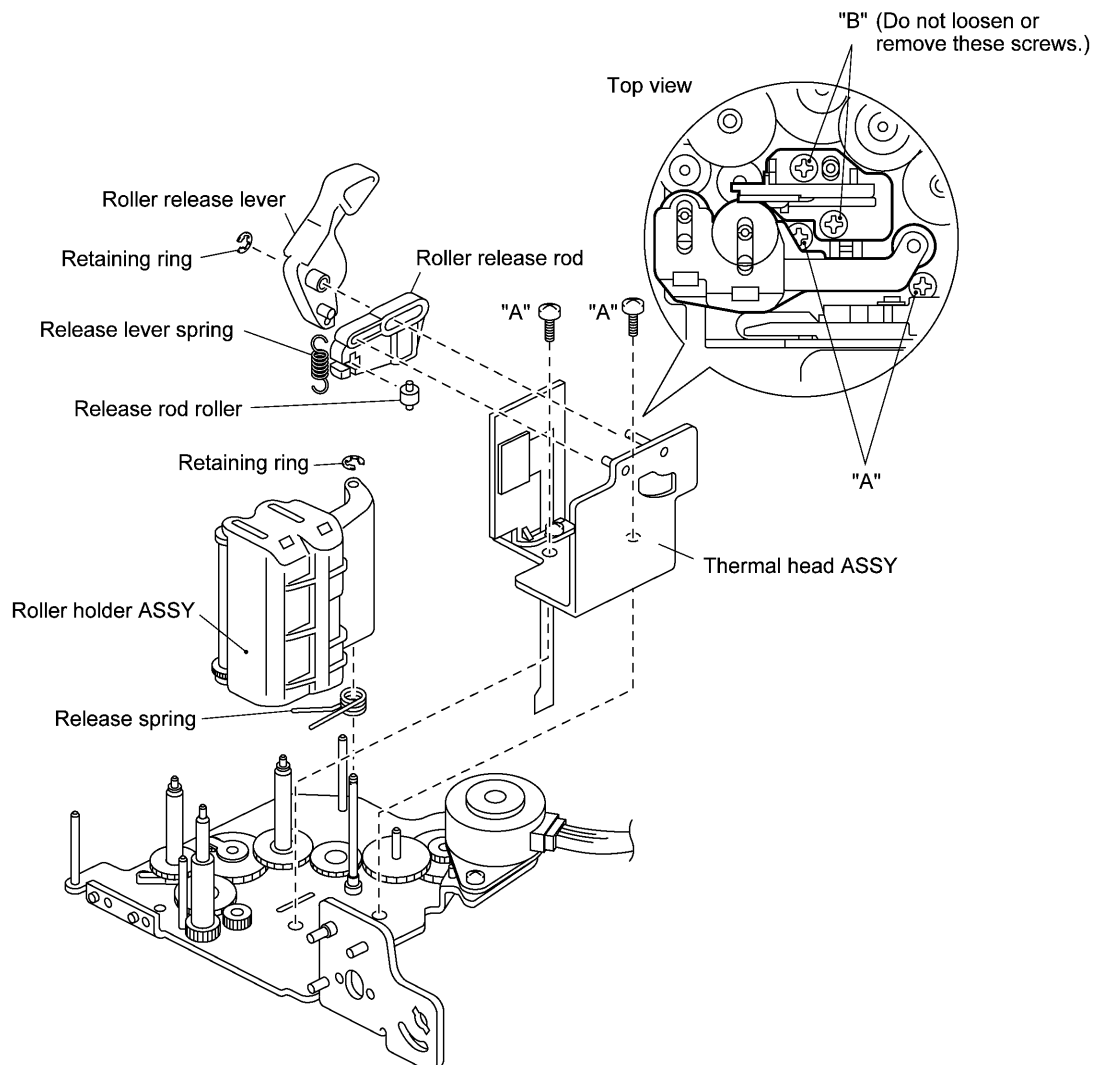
Removing the Roller Holder ASSY, Thermal Head ASSY, and Roller Release Lever
